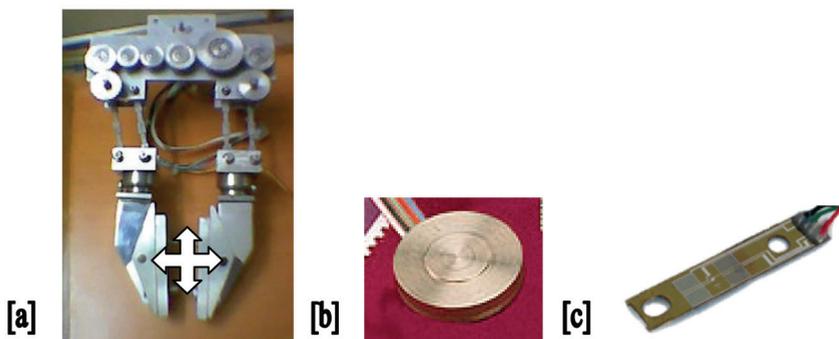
Photographic view of [a] jaw gripper assembly [b] LC & [c] TBS used in case-study II
